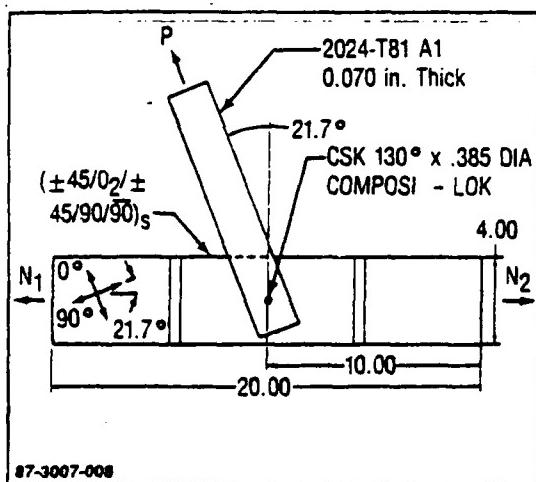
Combined Load Joint Test Specimen (Bolt Bearing Angle 21.7°)
